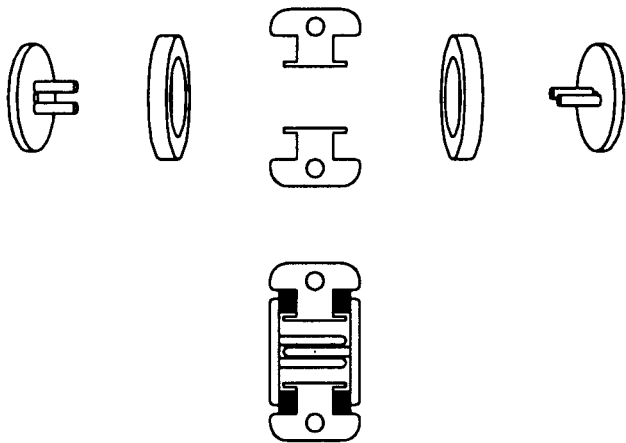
Exploded and Assembled Views of a Possible RFD Linac Drift Tube Design.
